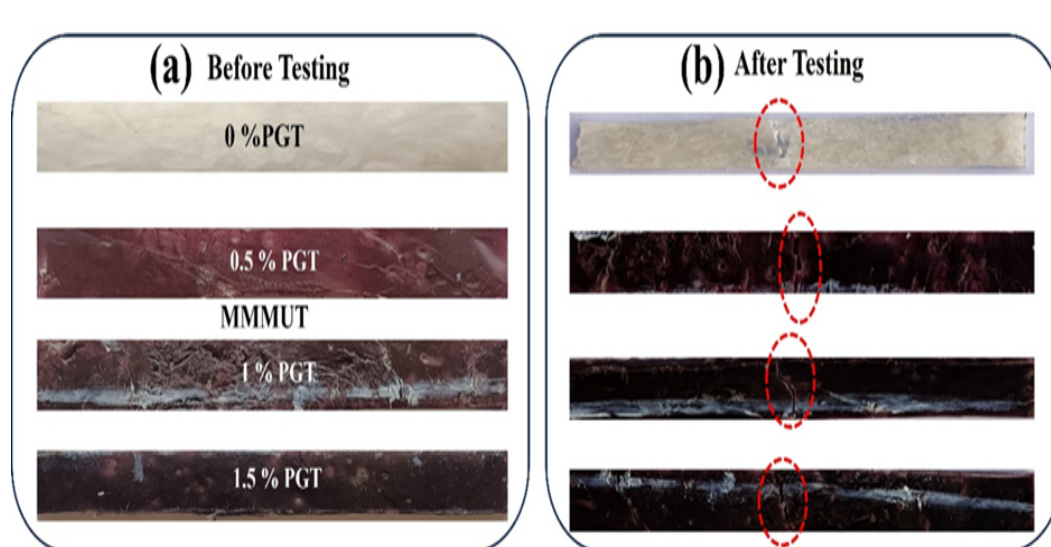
Flexural testing specimens (a) Prepared specimen (b) Broken specimen.
